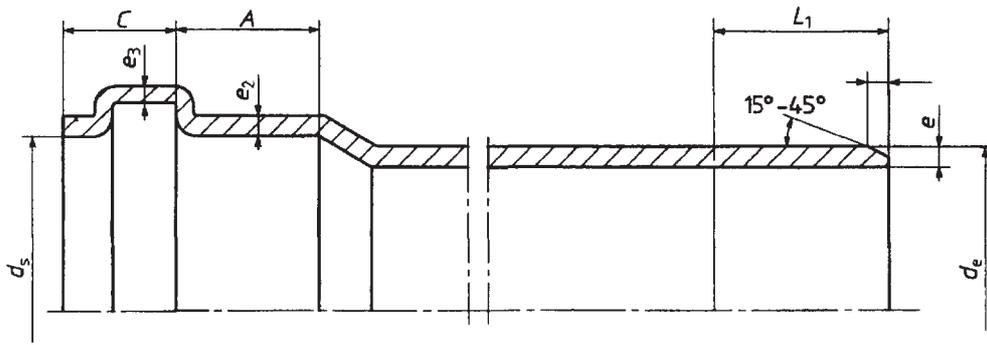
Basic dimensions of sockets and spigot for elastomeric ring seal joints
